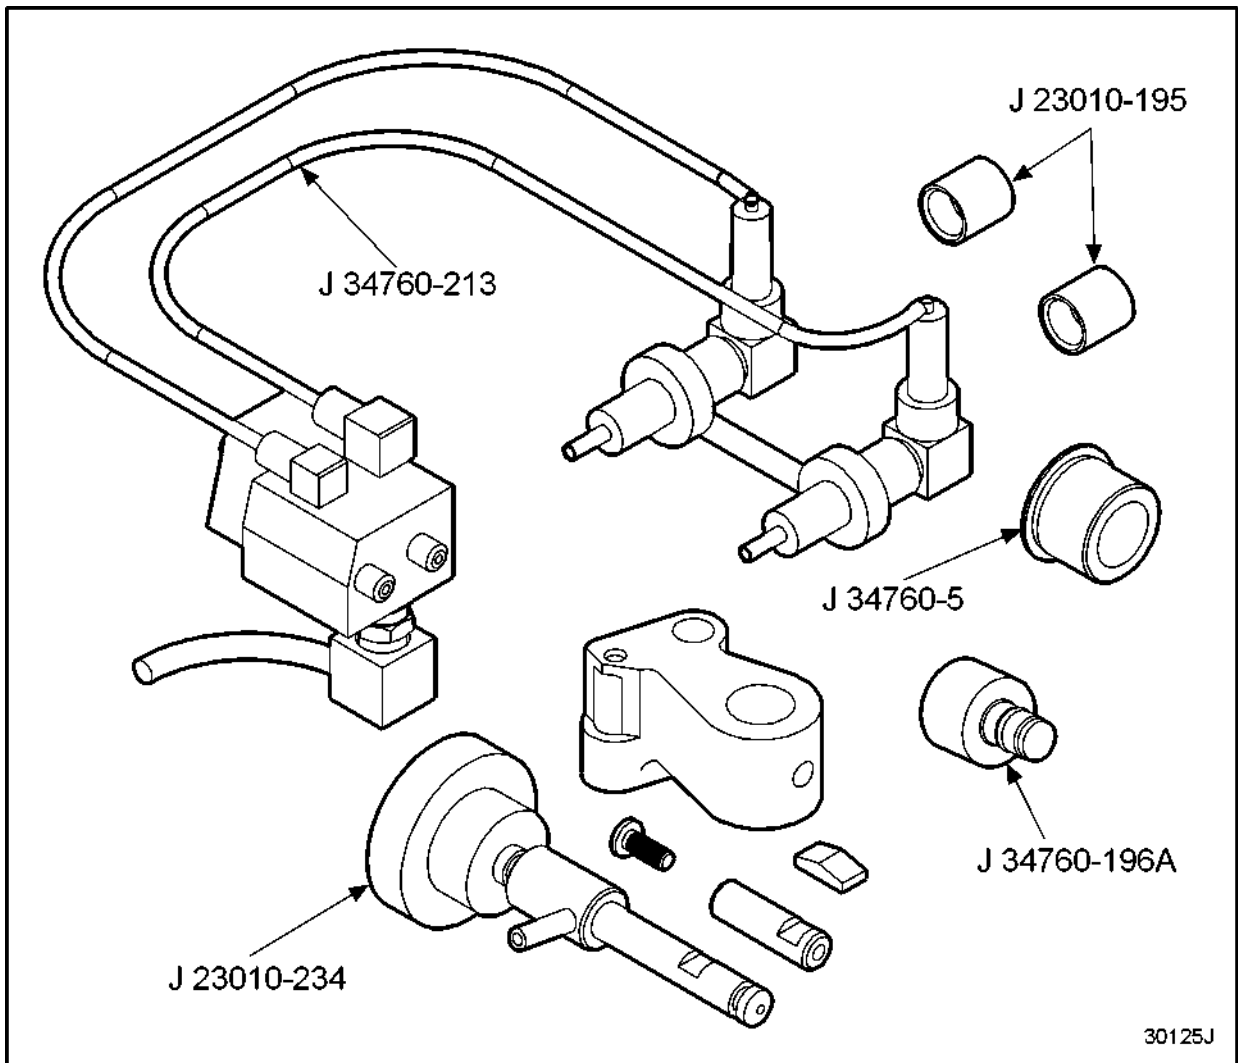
Injector Pop Fixture Adapter, 149,J 34760-144
